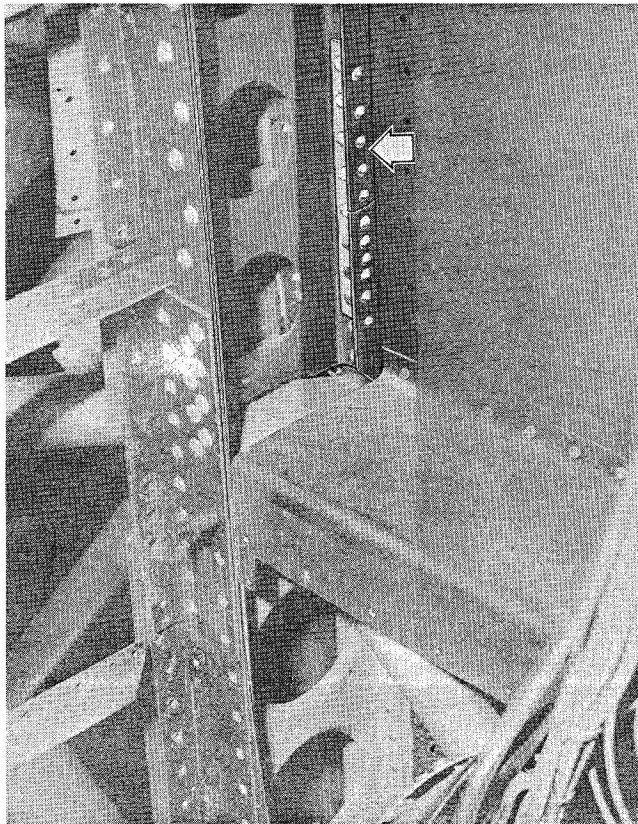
Splice, Upright Stringer, Bulkhead 5 45B-3-47
